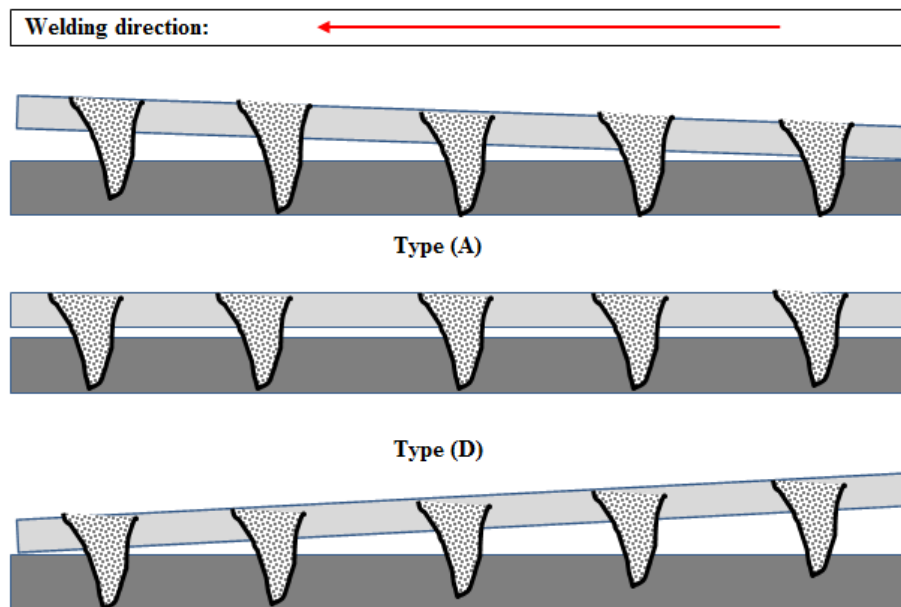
Hypothetical design of welded part based on the different types of welding
